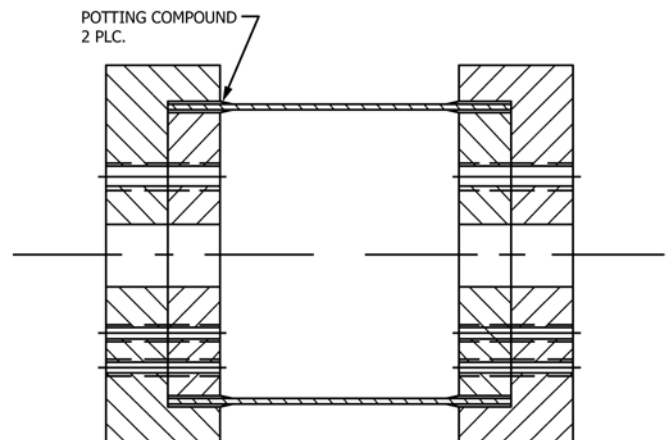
Illustration of the Assembled Compression Fixture and Specimen
